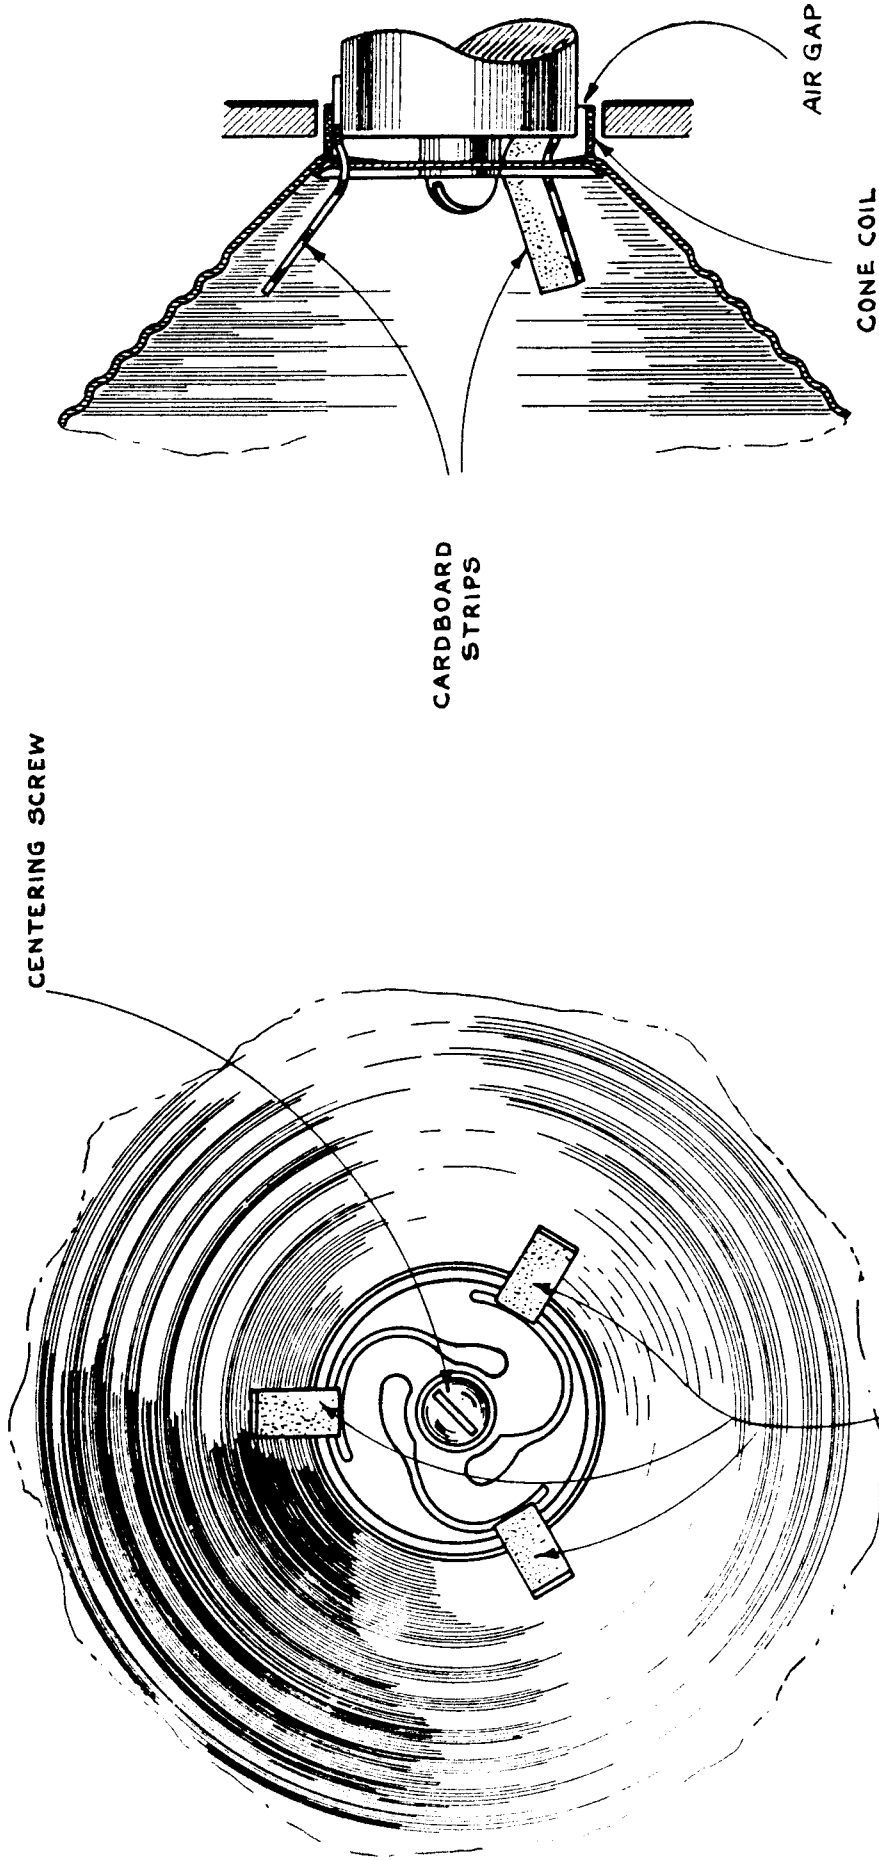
Method of centring Moving Coil of A.W.A. Loudspeaker.
